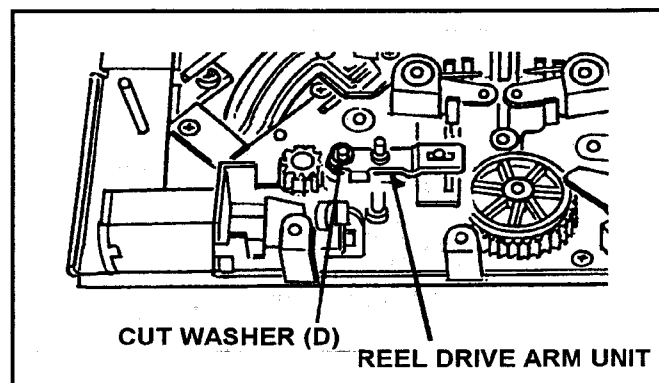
Removal of Reel Drive Arm Unit
